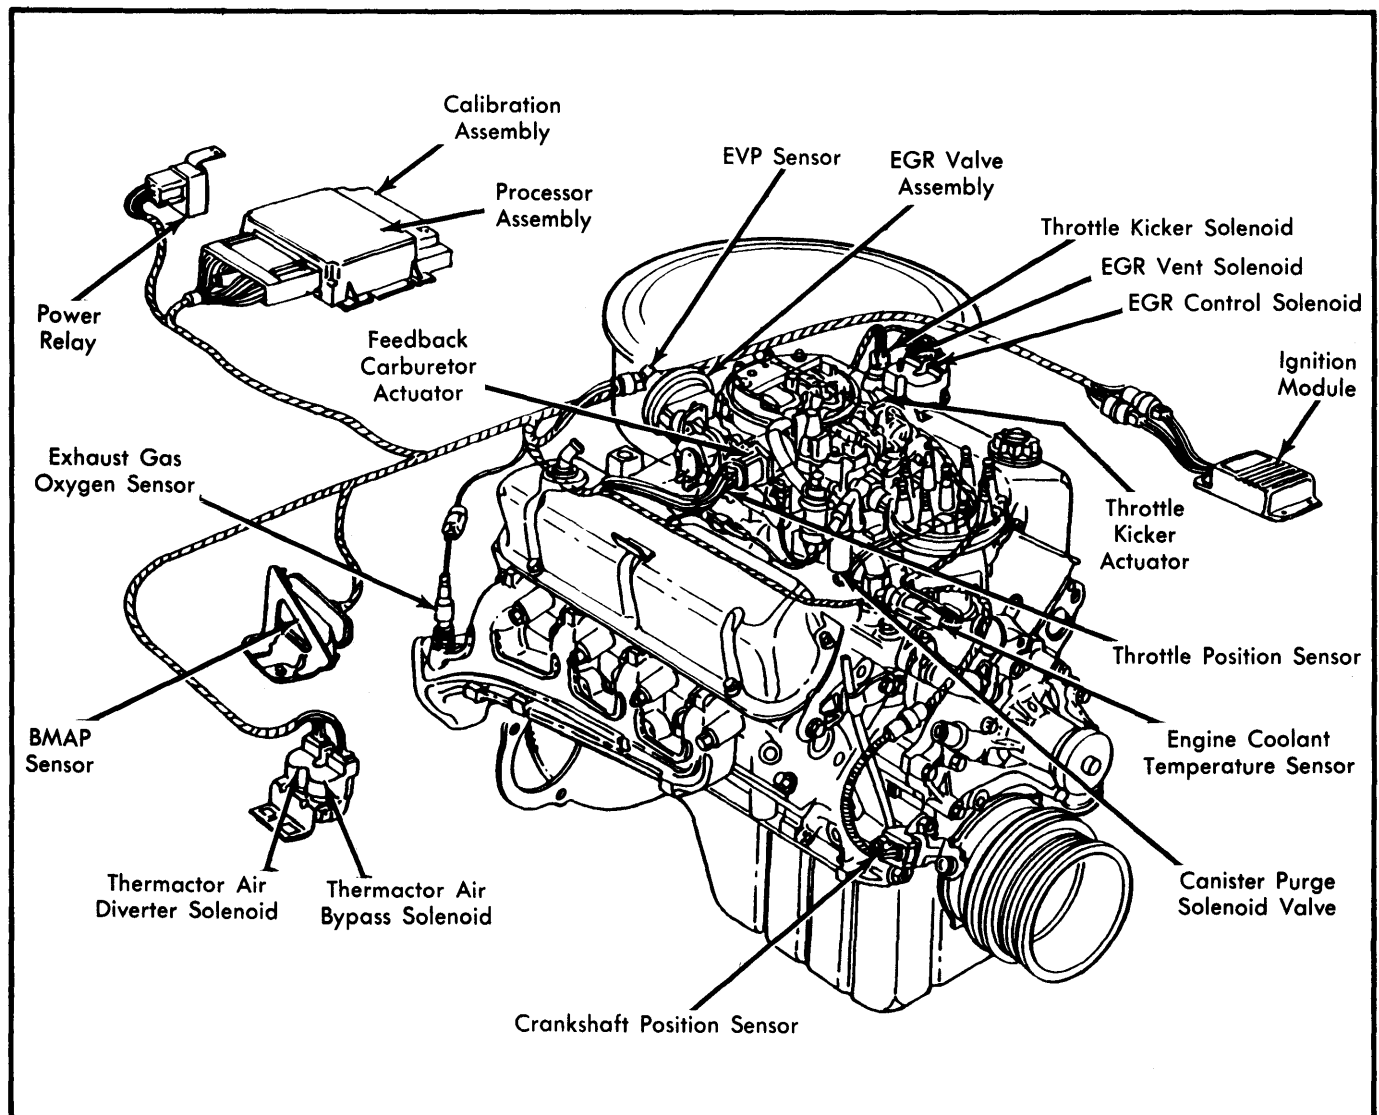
Electronic Engine Control Component Locations (Carburetor Model Shown)
